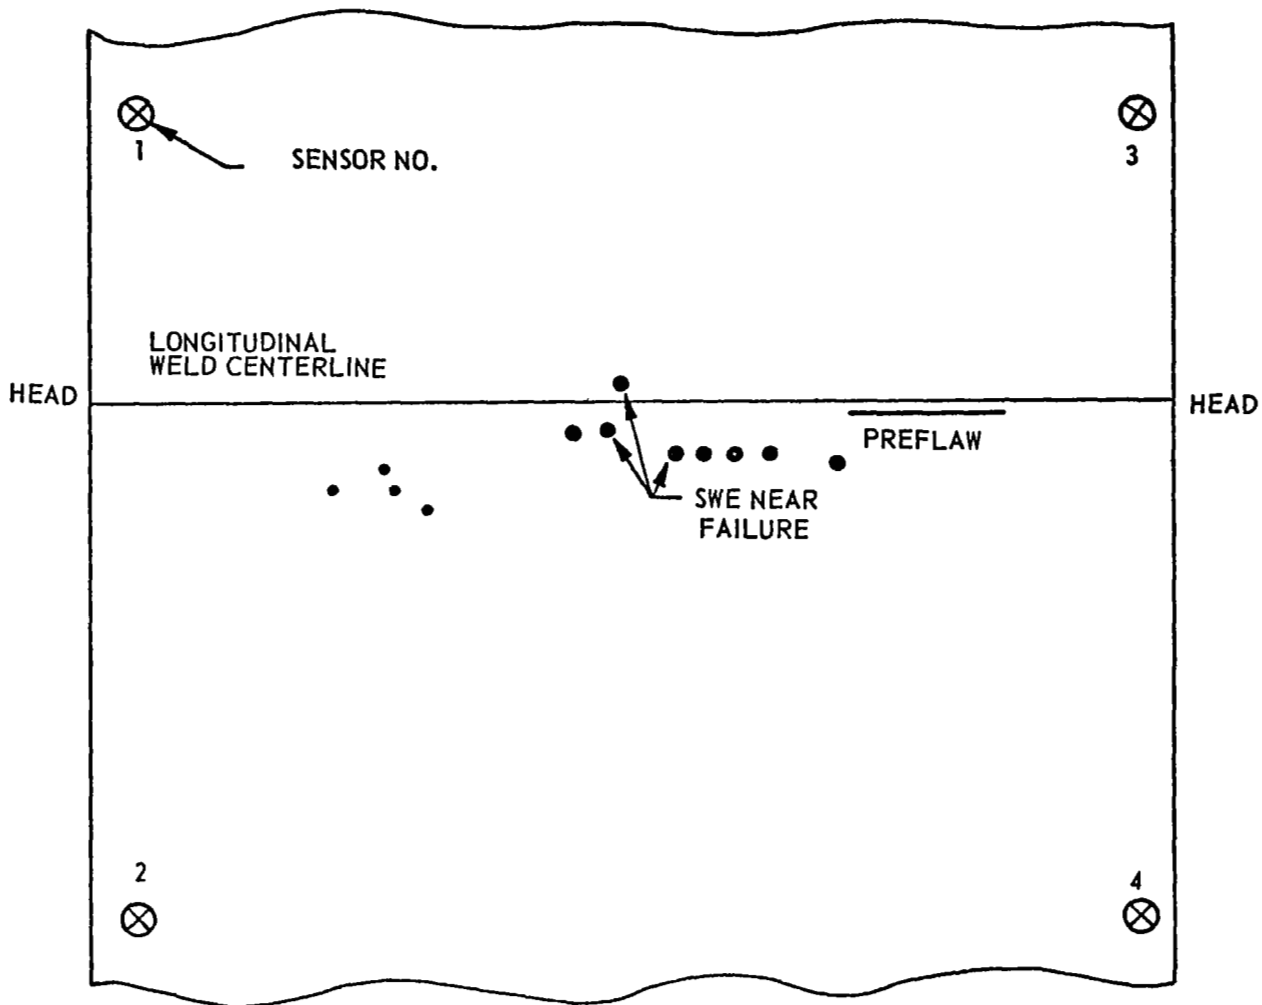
Location of SWE Sources Detected When Pressurizing (5th Cycle) the 2219-T87 Aluminum Vessel to Failure (945 psi) at -320°F . Weld Preflaw Location from Which Failure Initiated is also Shown.
